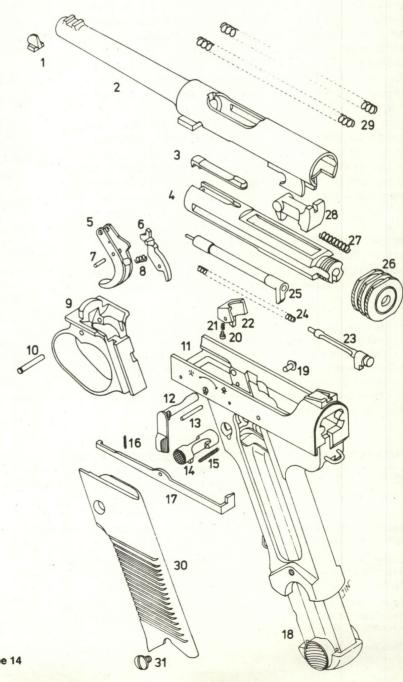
Disassembled view of the 8mm Type 14 pistol. (Jimbo)
